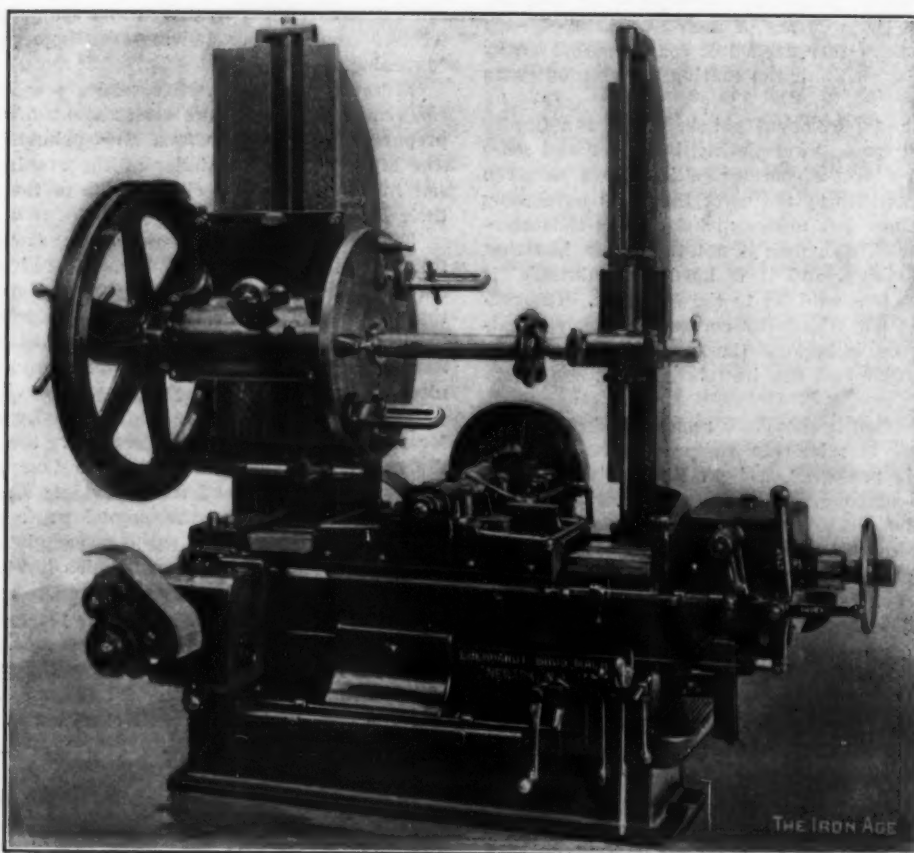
The New No. 5 60-In. Automatic Spur Gear Cutter Built by the Eberhardt Brothers Machine Company, Newark, N. J.
